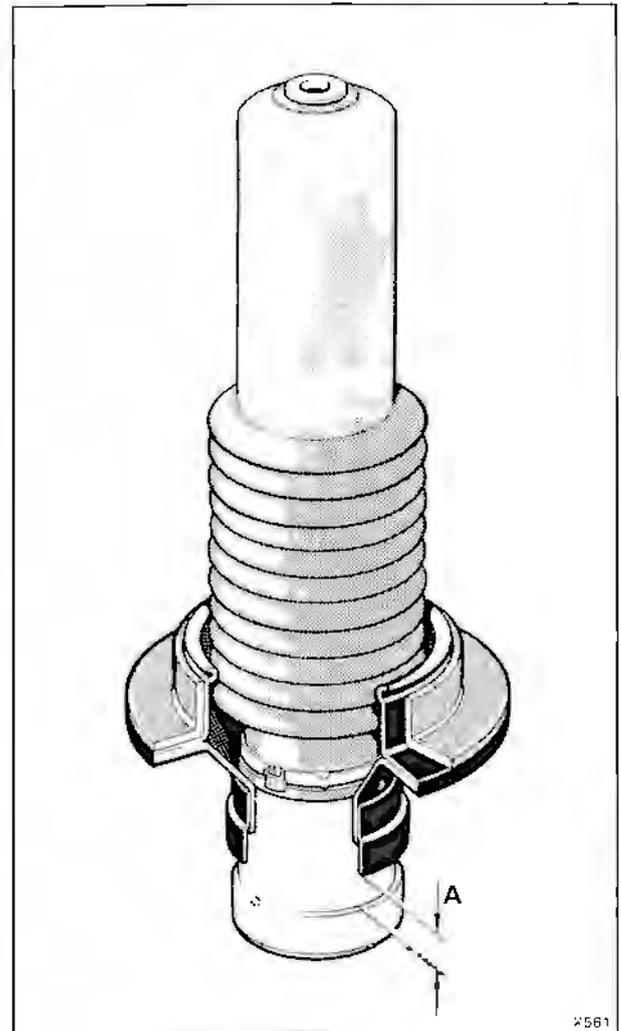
Spring support plate, collar, and sleeve assembly
